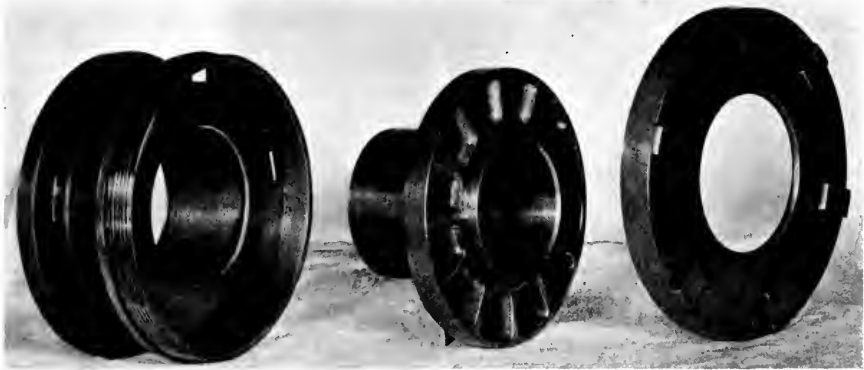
Photograph of water sealed gland for small turbine, showing impeller and seal chamber.
